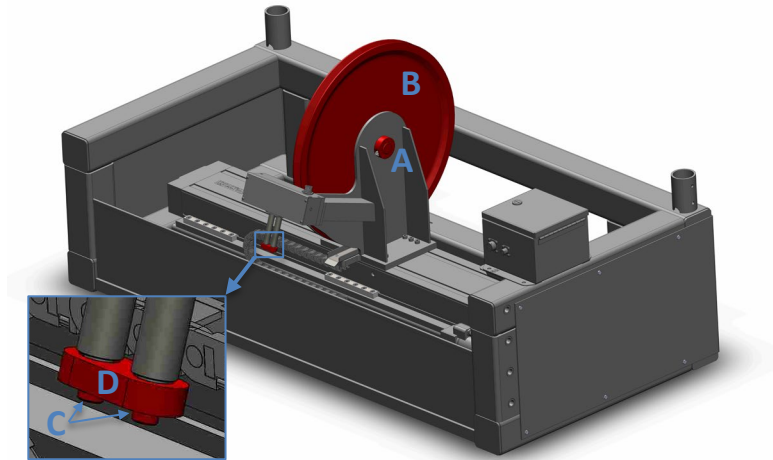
Level wind assembly. Parts that need to be removed for installation or removal of the cable are highlighted in red. They include the sheave axle (A), sheave (B), two 4 mm screws (C), and cable keeper plate (D).
